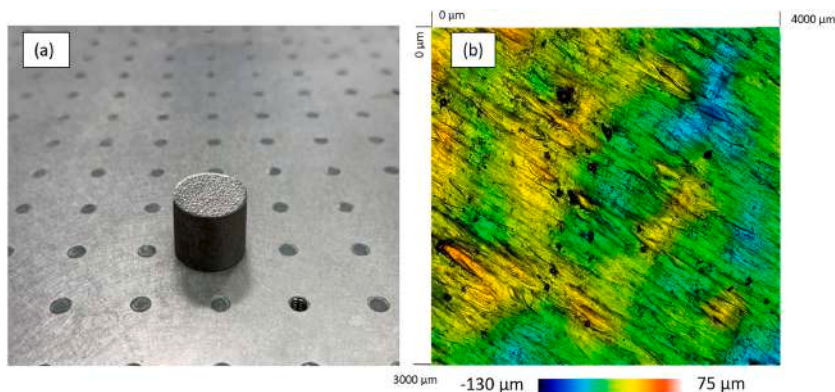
SLM as-printed metallic mirror: a) general view photo, b) optical profilometer sample surface image. The sample diameter and thickness were 25.42 mm and 15.59 mm, respectively.
